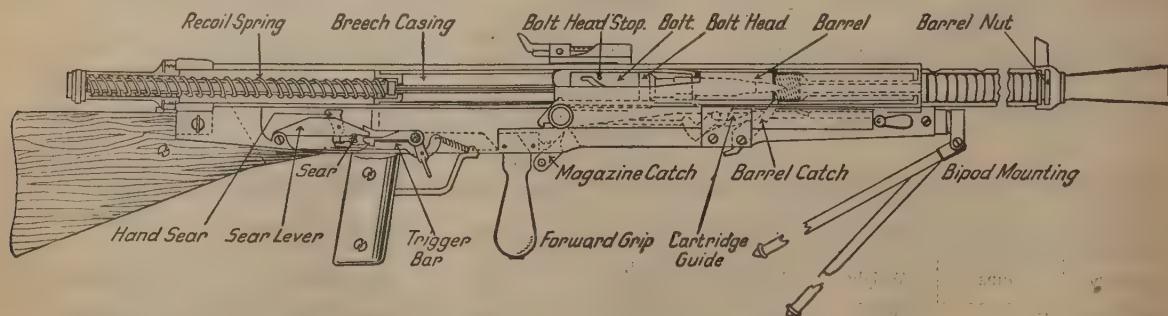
Chauchat light machine gun (long recoil). Total length 45½ inches.
